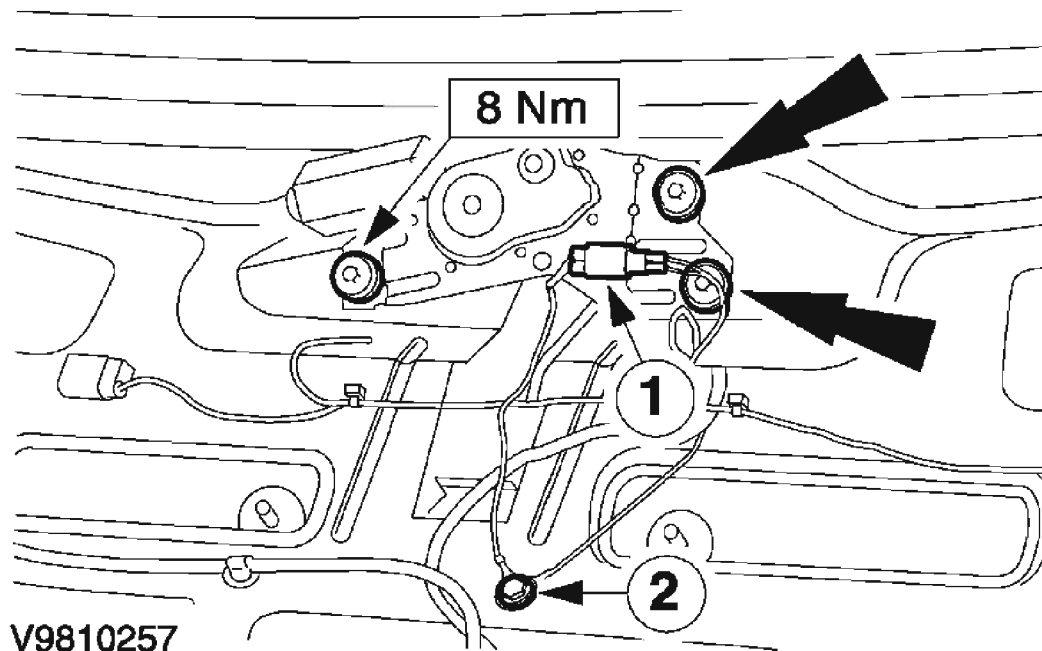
Disconnecting Wiper Motor Electrical Connector And Bolts
